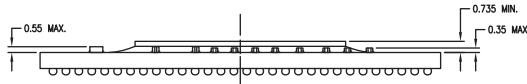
Package Dimensions for FBVA900 (XCKU035 and XCKU040)
